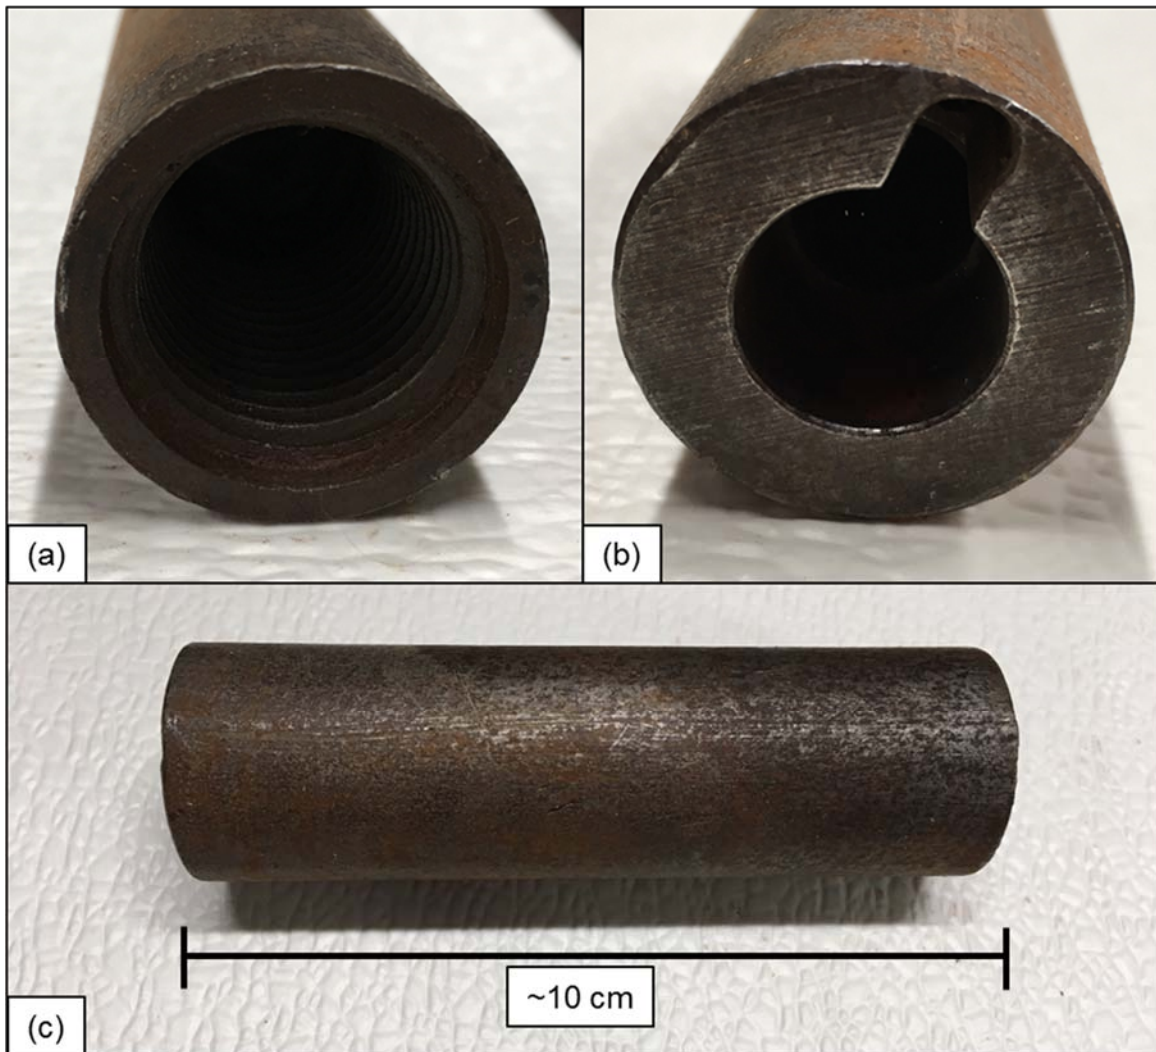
Steel connector rod used to connect the sensors to the steel CPT rods during installation: (a) view of the connector rod end with threads, (b) view of the connector rod end with machined key, and (c) side-view of the connector rod.
